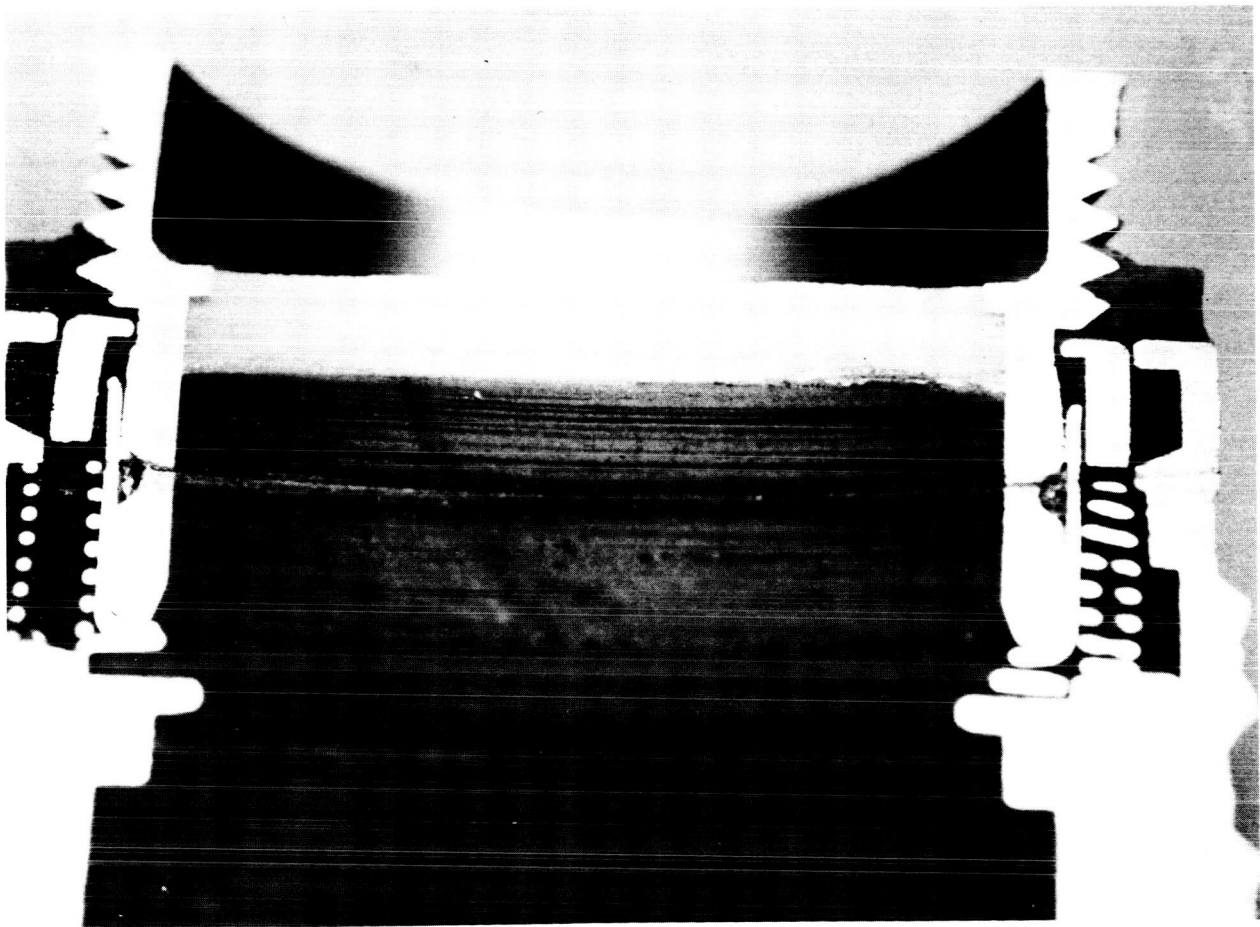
Section of potted connector showing fractured glass at potting interface
